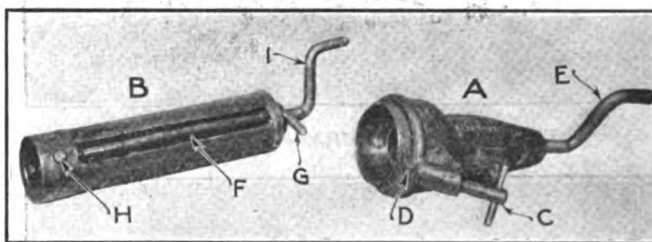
AXLE HOUSING CAP PULLER AND ROLLER BEARING SLEEVE PULLER
